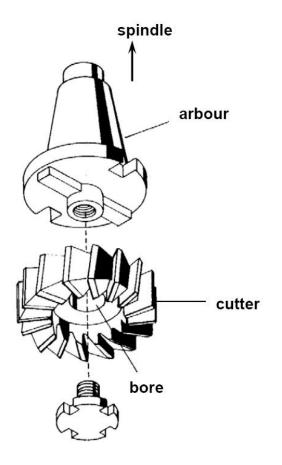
Mounting shell and face milling cutters in milling machine spindle.
